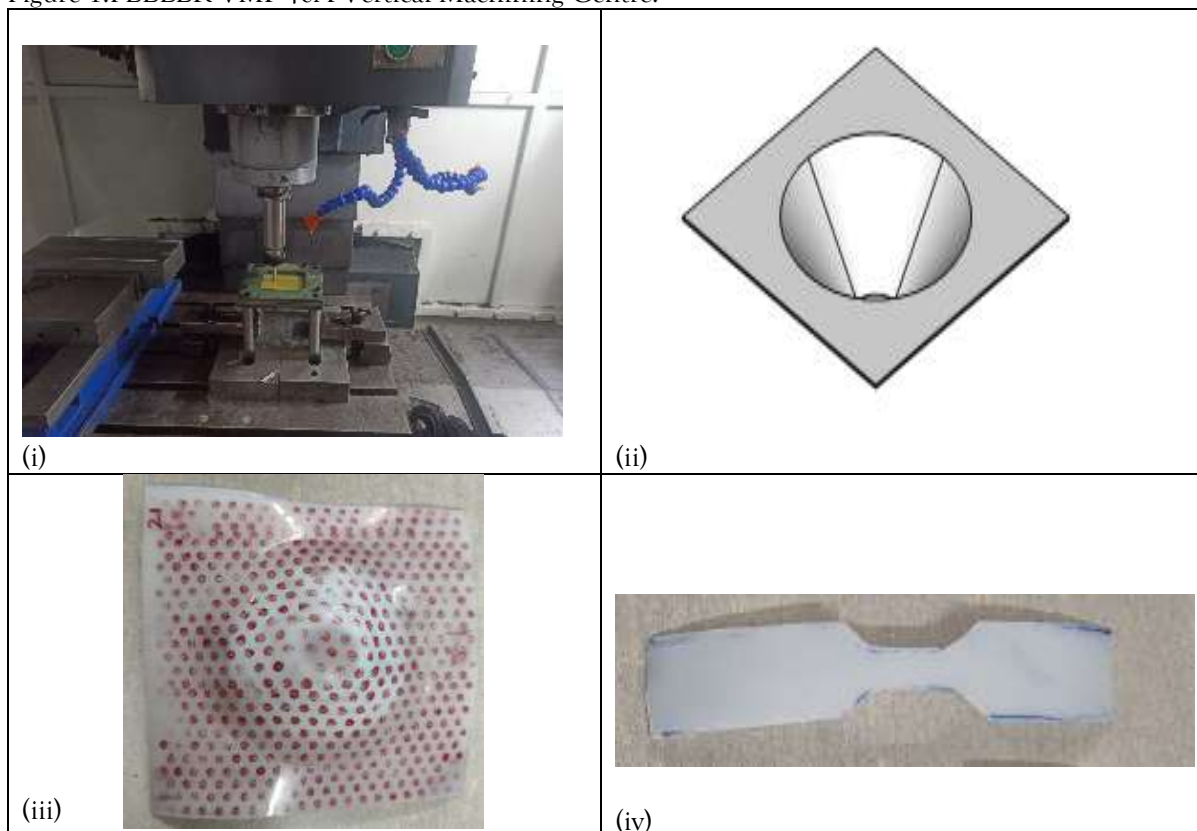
(a) Fixture (b) Test Geometry (c) UHMWPE part (d) Tensile Test Specimen.
